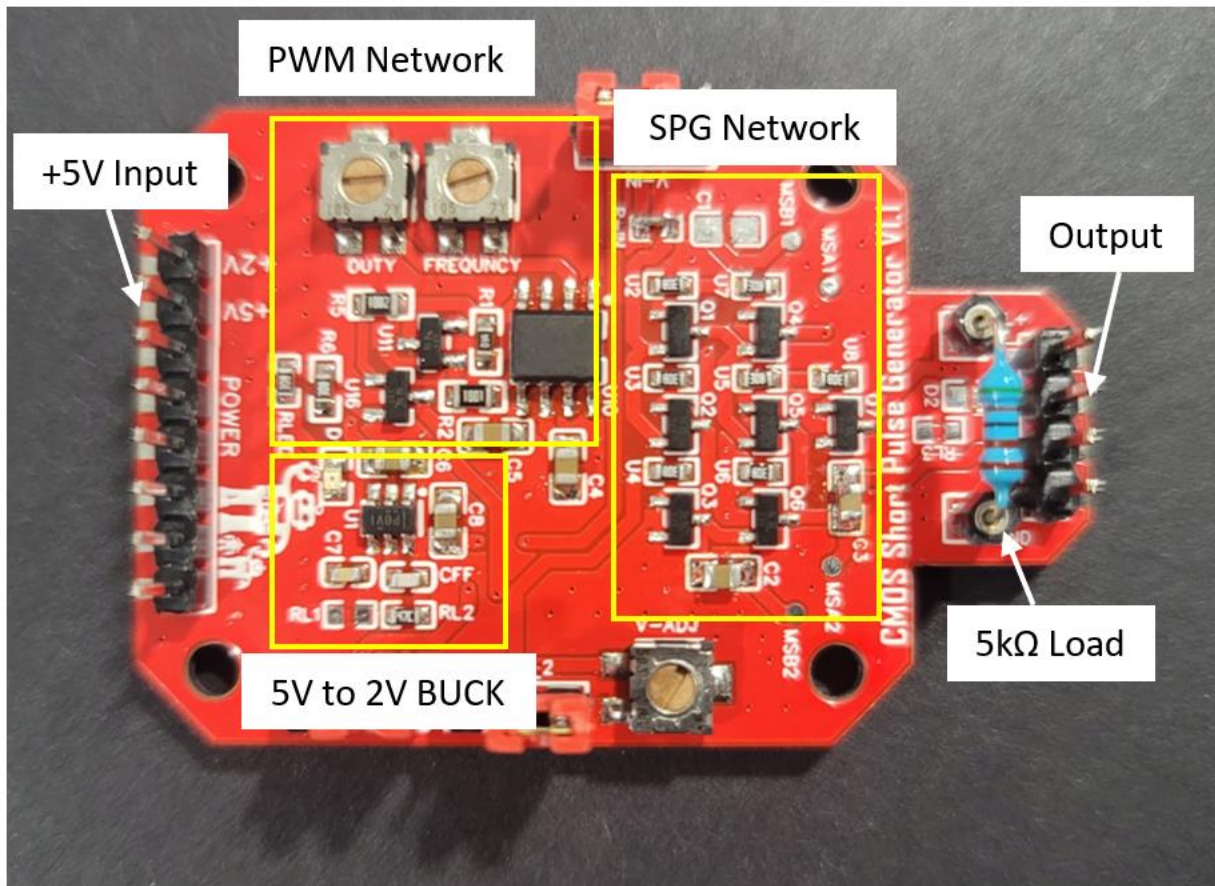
9 PCB layout showcasing the arrangement of circuit components.
